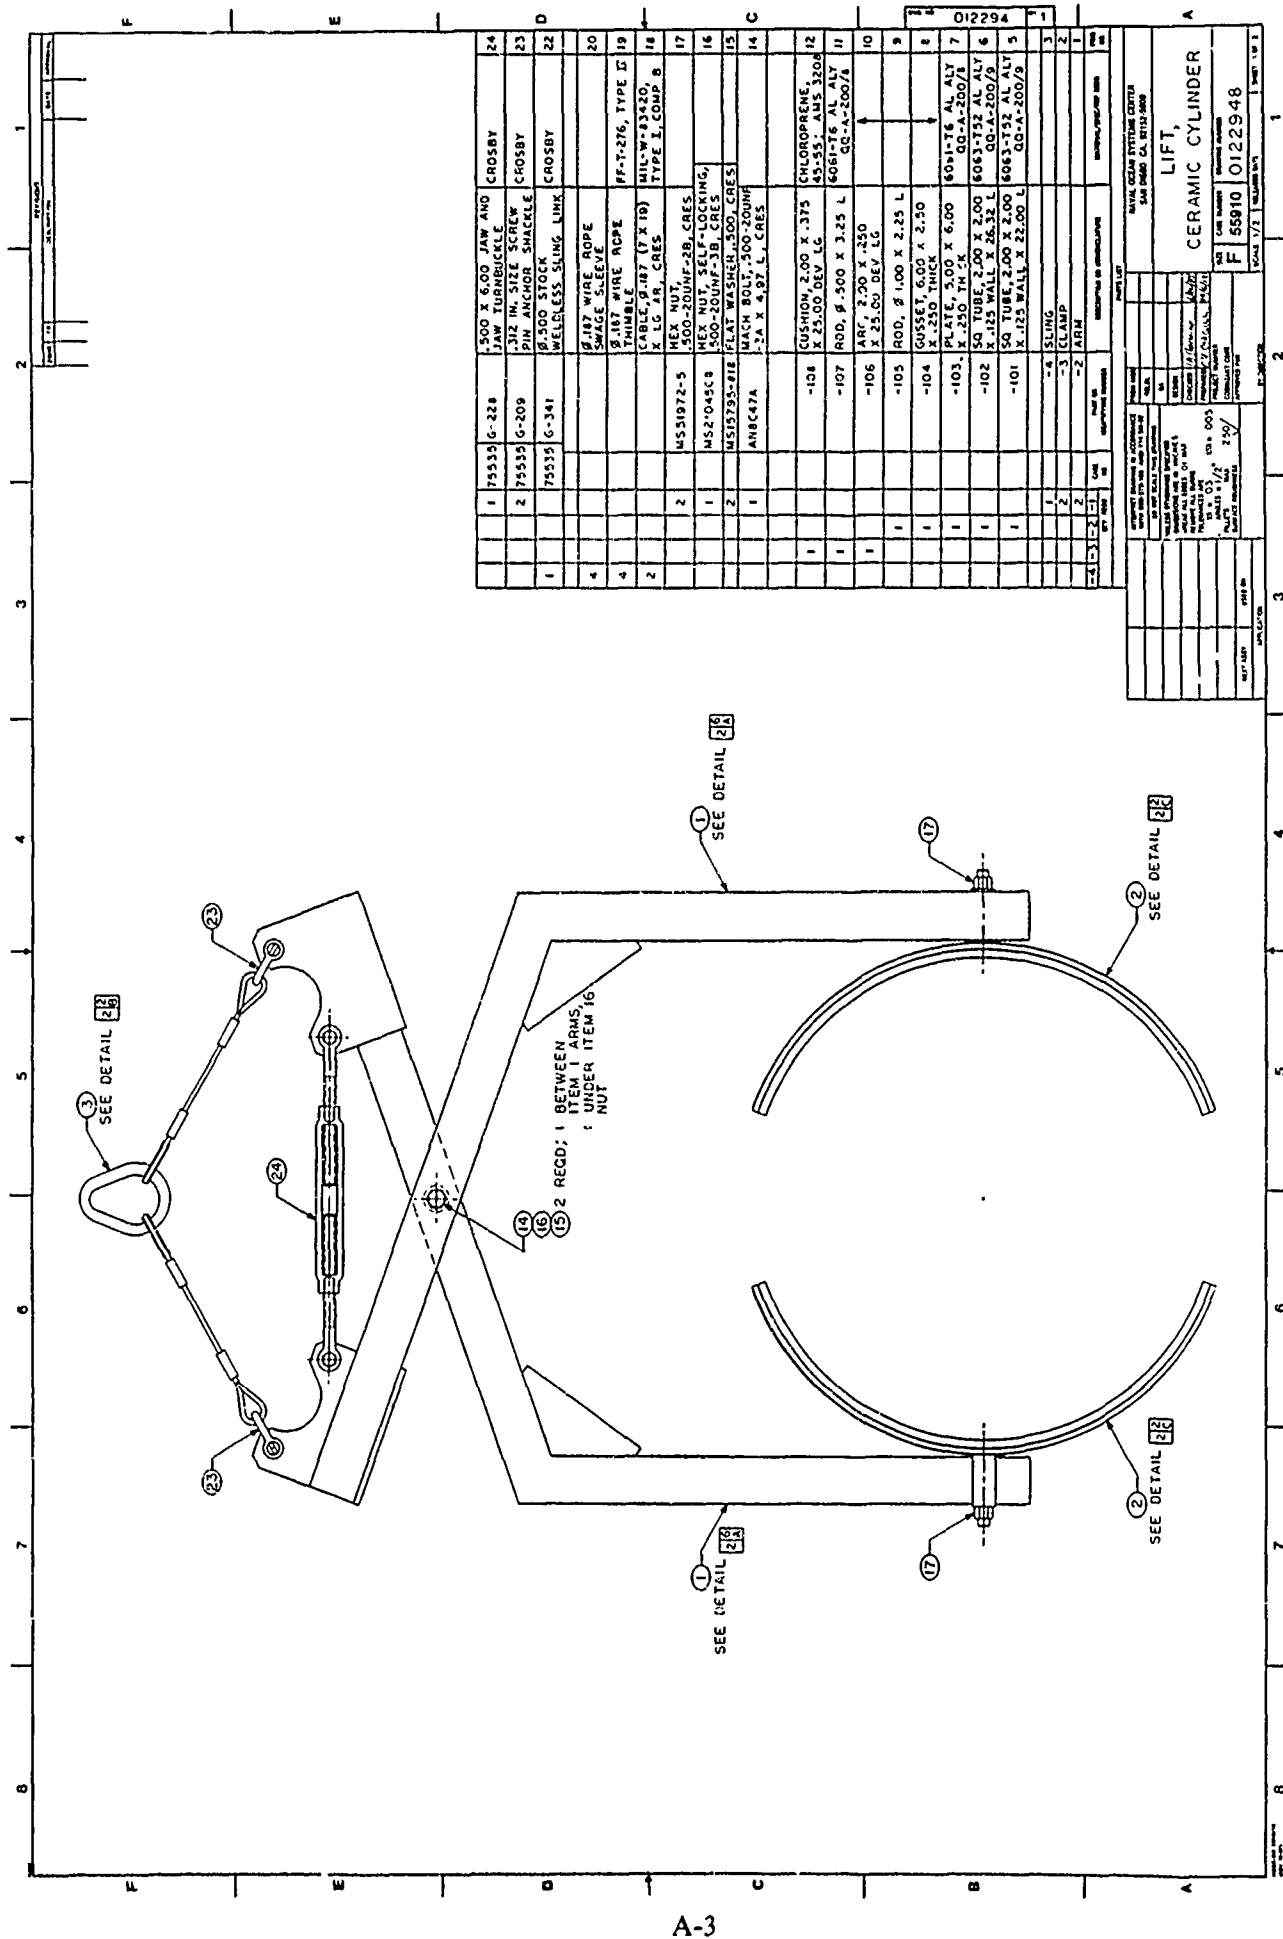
Fabrication drawing of lifting fixture for ceramic cylinders; assembly.
